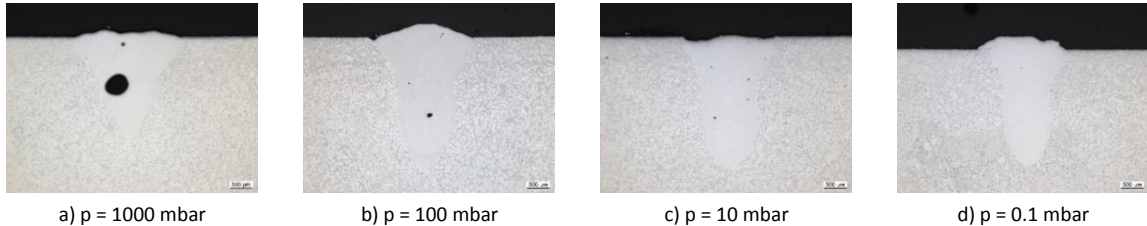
Metallurgic cross sections of typical welds performed with a welding speed of 2 m/min at varied ambient pressure.
